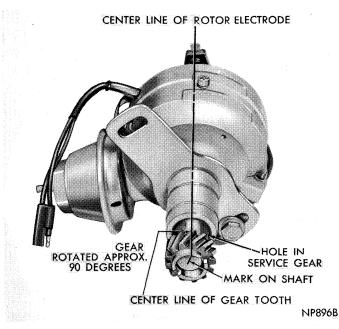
Aligning Gear Teeth With Centerline of Rotor Electrode
